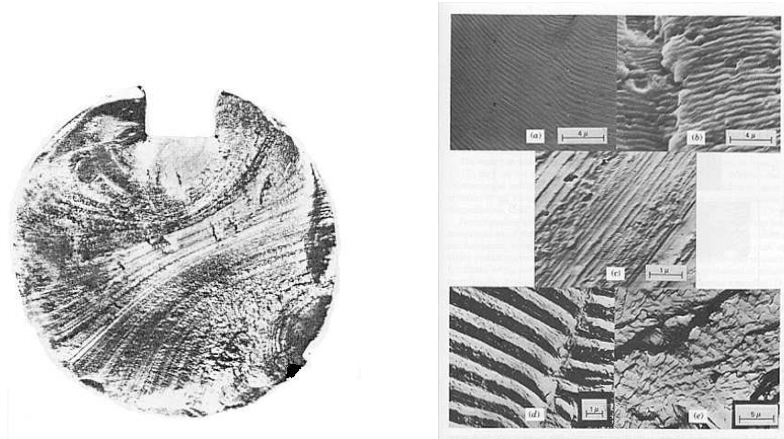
Clam shell fatigue crack surface and striations [30].
